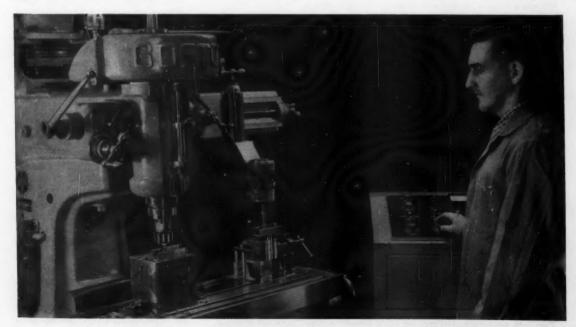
Vertical mill, Fig. 3, equipped to automatically profile a printing-press shifter fork
